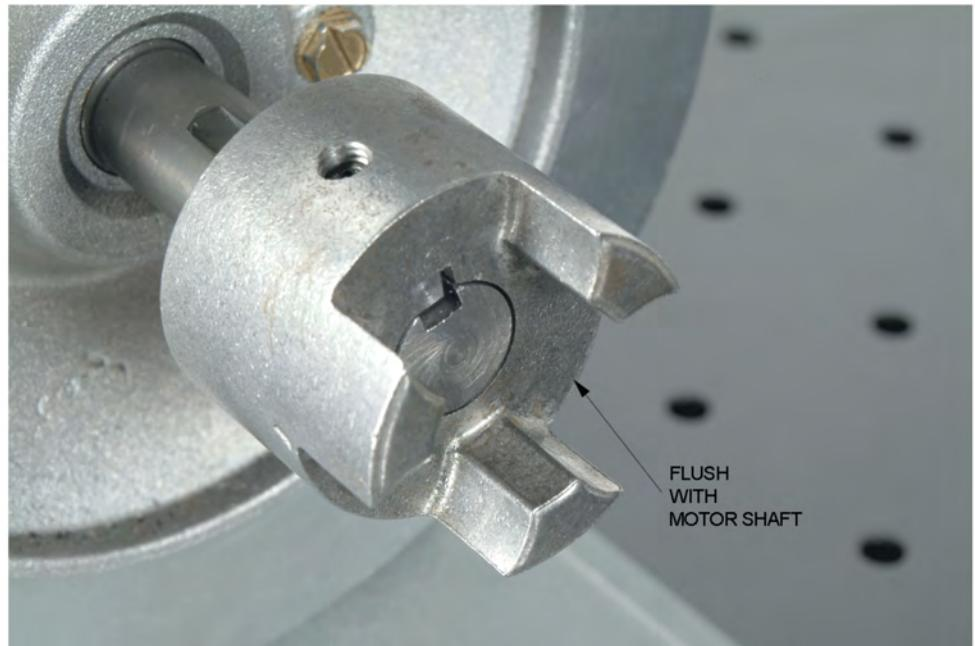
Installation of the coupling hub on the Motor shaft.
